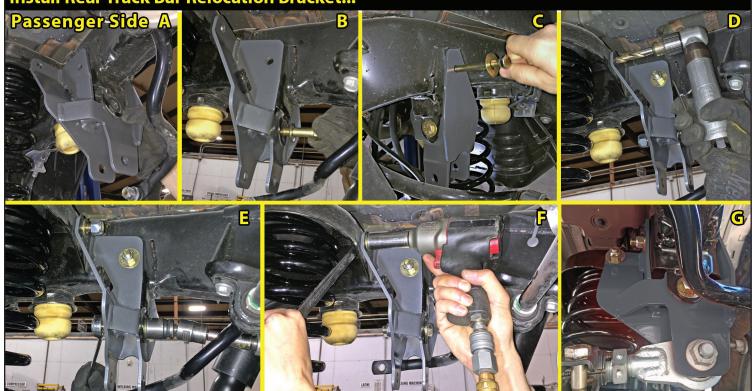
F] Tighten the 1/2" bolt at the spring flange plate. [3/4"] (65)
